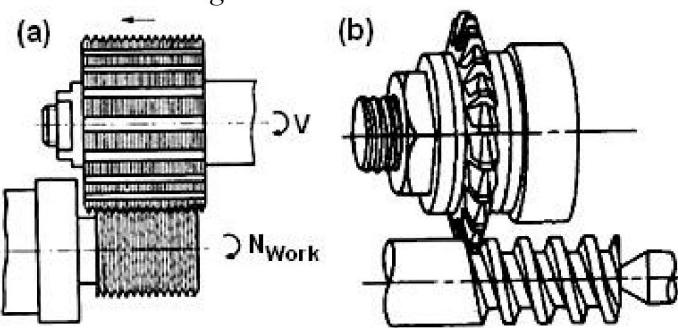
(a) Short thread milling (b) Long thread milling
